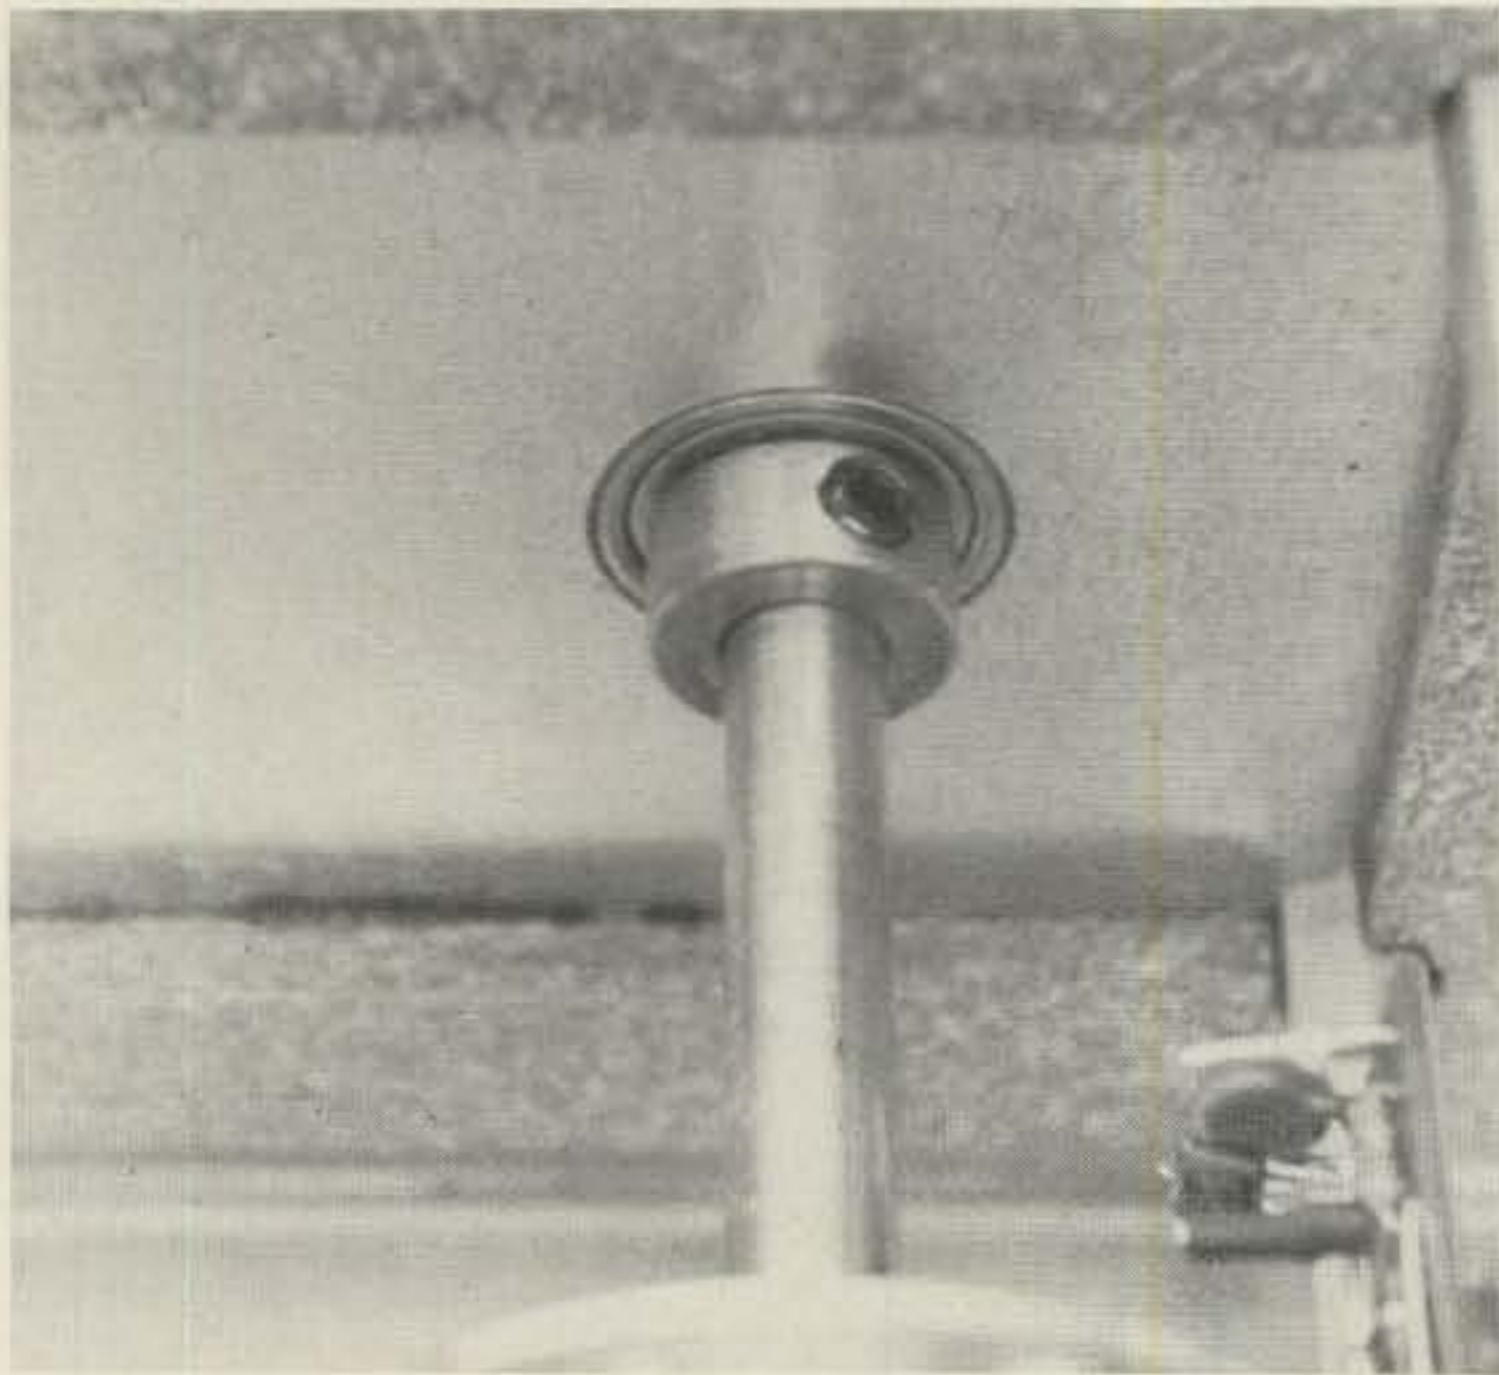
Photo C. A view of the bottom of the top bearing and the gasket that will seal the weather cover.
